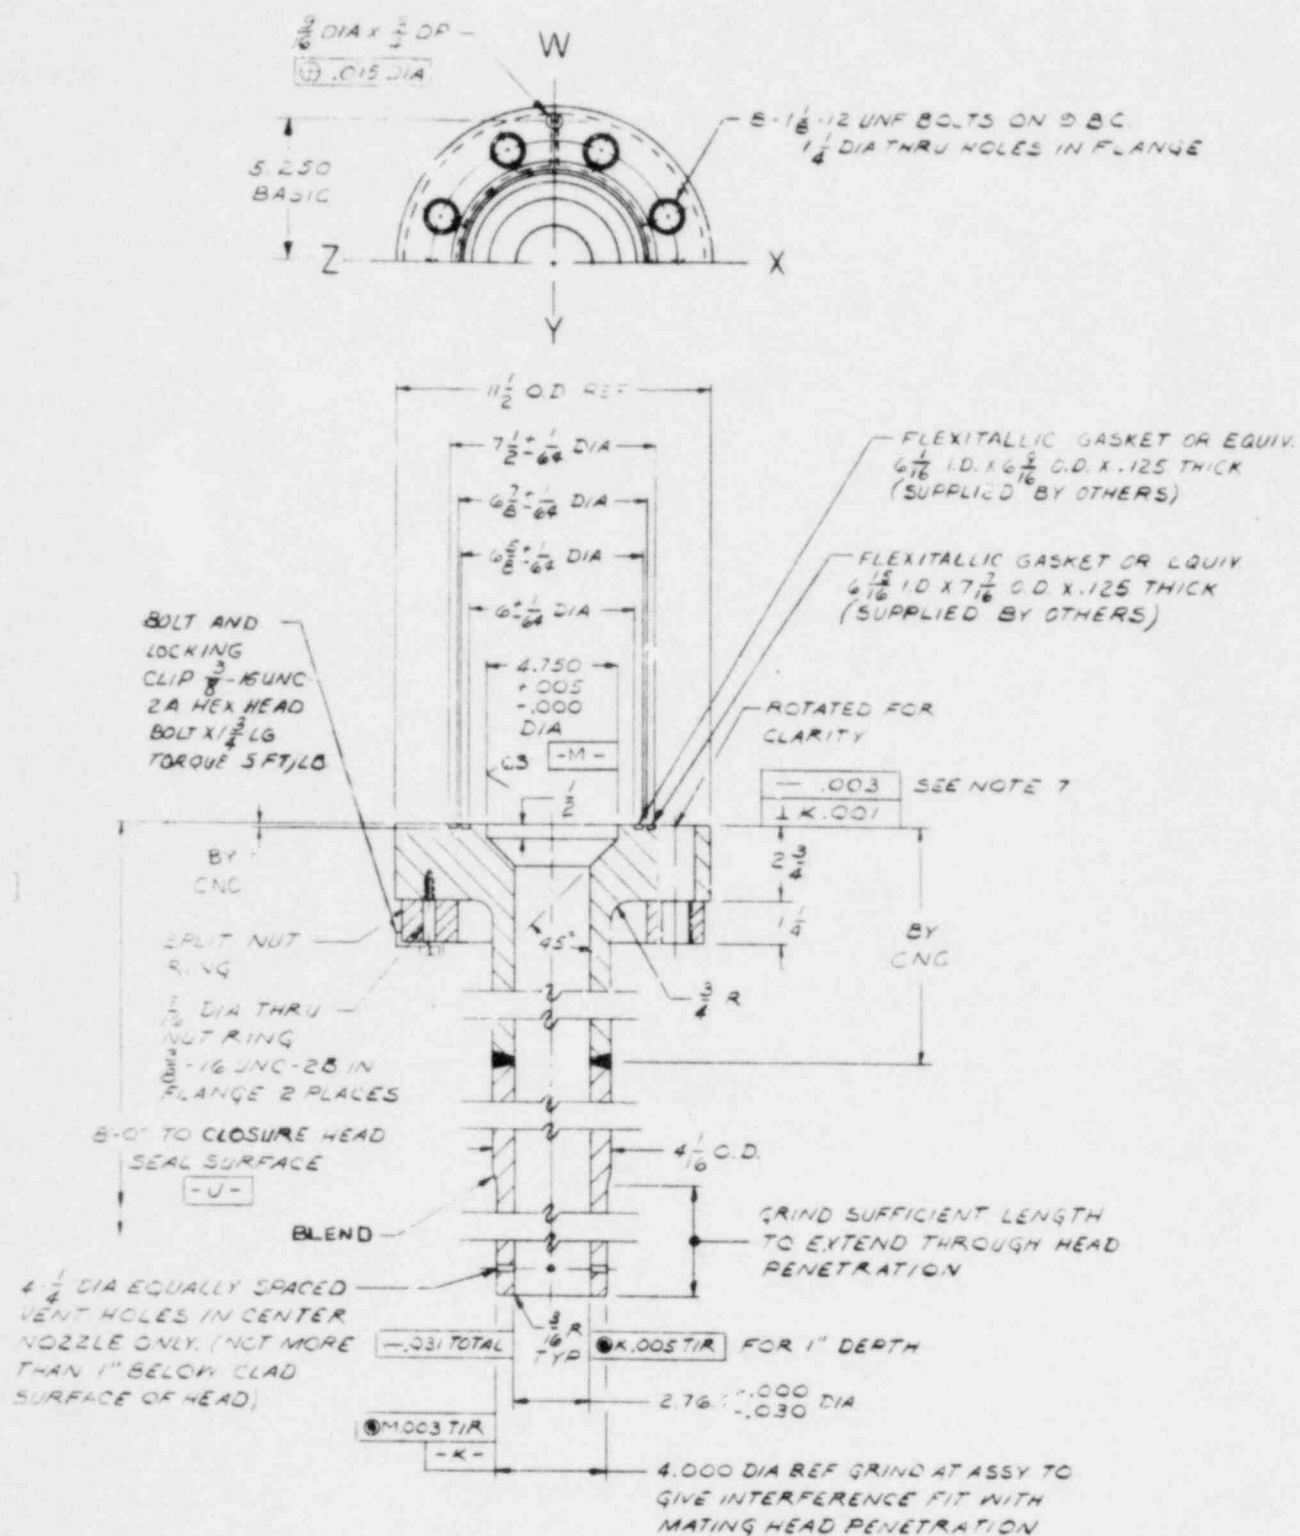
Control Rod Drive RV Head Nozzle
